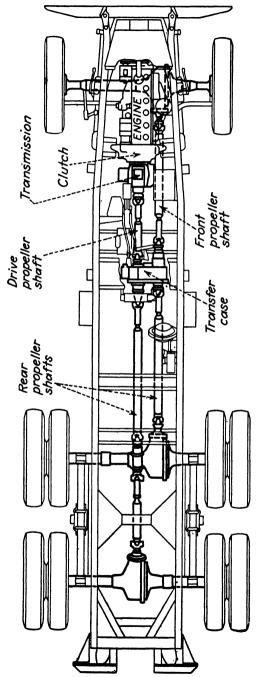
Plan view of chassis of six-wheel all-wheel drive military truck showing arrangement of front driving axle, transfer case, and tandem-drive rear-axle unit
